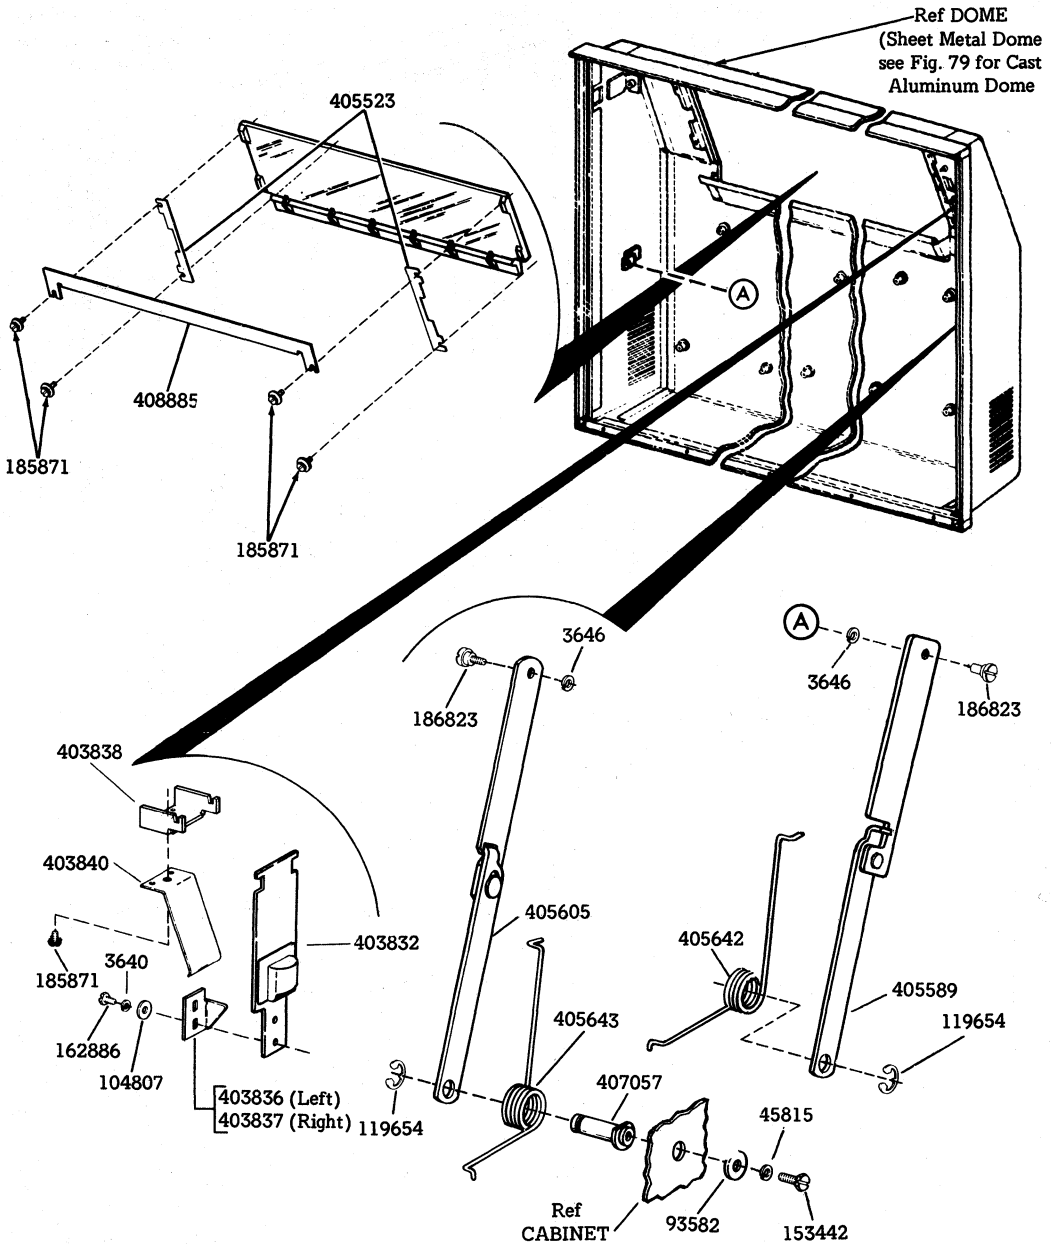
CAB353/YZ Printer Cabinet Core for Adjacent or RO Tractor Feed Printer - 132-Column (Cont)
